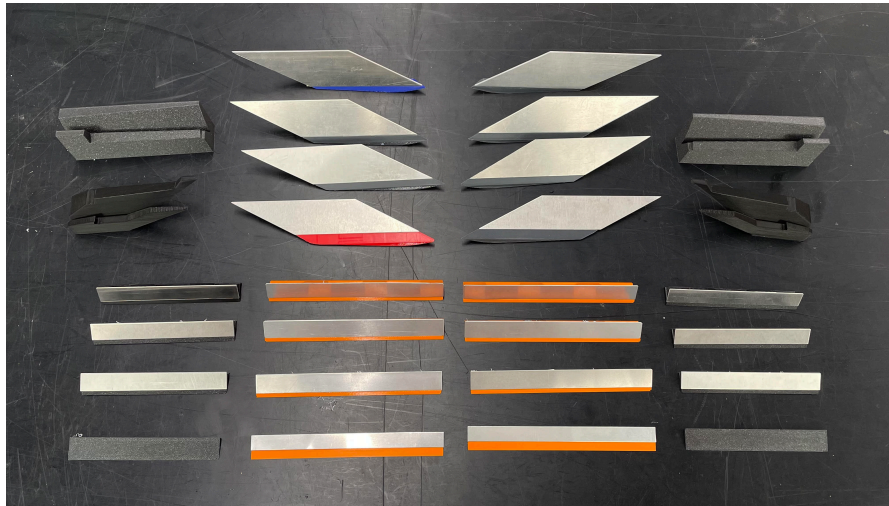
Assembled flap, spoiler, and alignment block parts for the 1.84% scale Flying V LTT model
